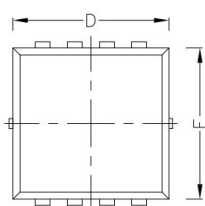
DETAIL PACKAGE OUTLINE DRAWING (PDFN3.3*3.3-8L)
